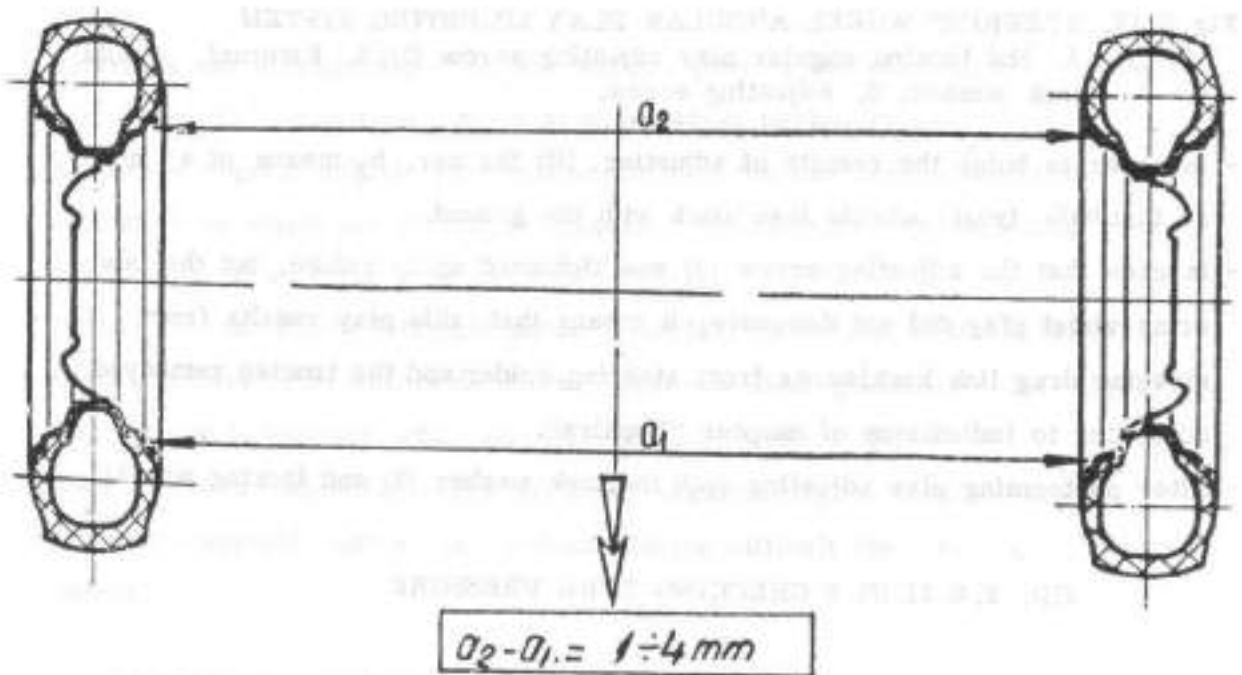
MEASURING FRONT WHEEL TOE-IN.
